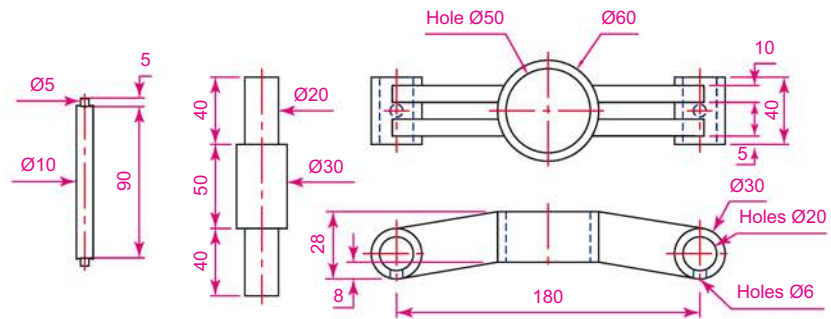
Raster image in a drawing – drawings into which file is to be inserted
